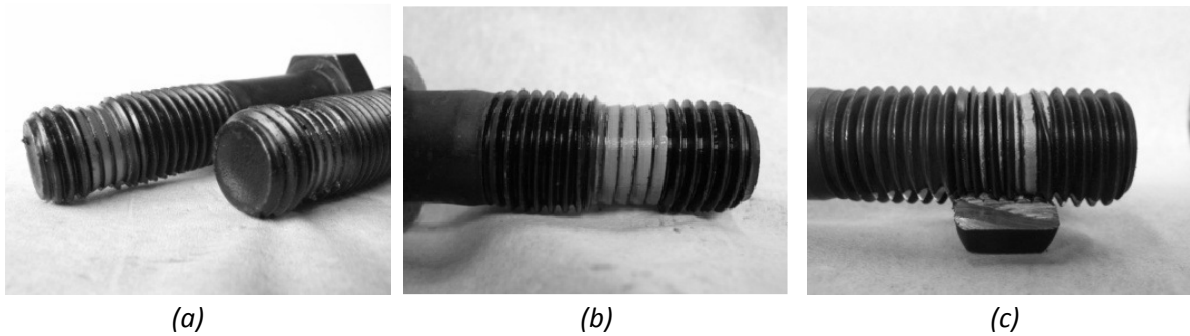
Bolt thread stripping failure with some yielding of the threaded part (b) or the nut (c)
